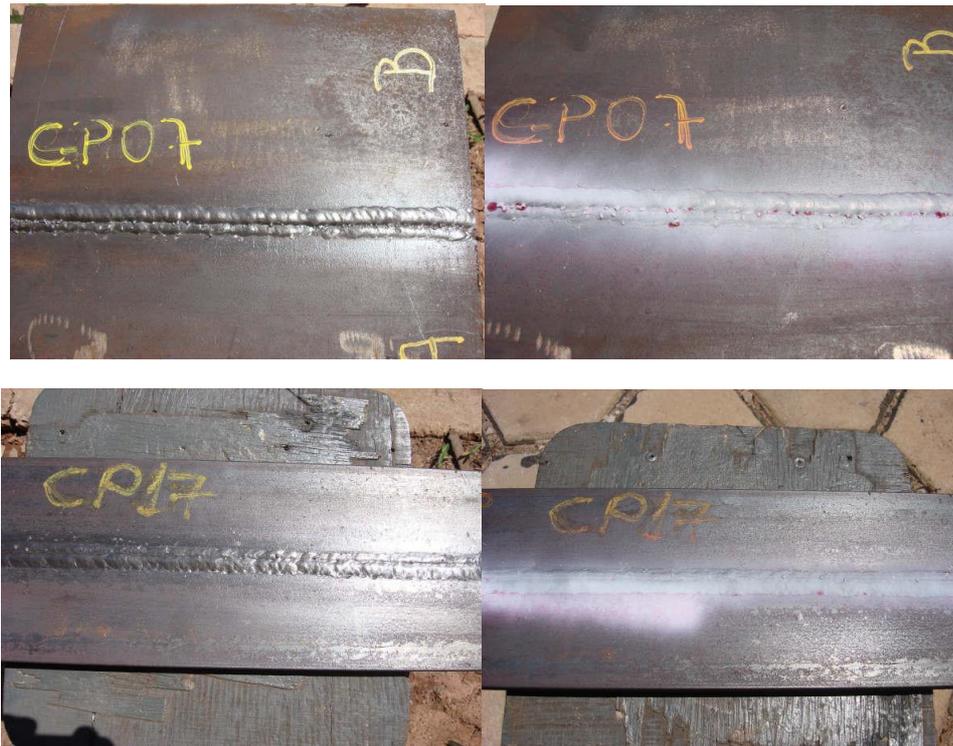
Superficial aspect of the welded joints by FCAW-CW welding process (CP07), and FCAW welding process (CP 17).
